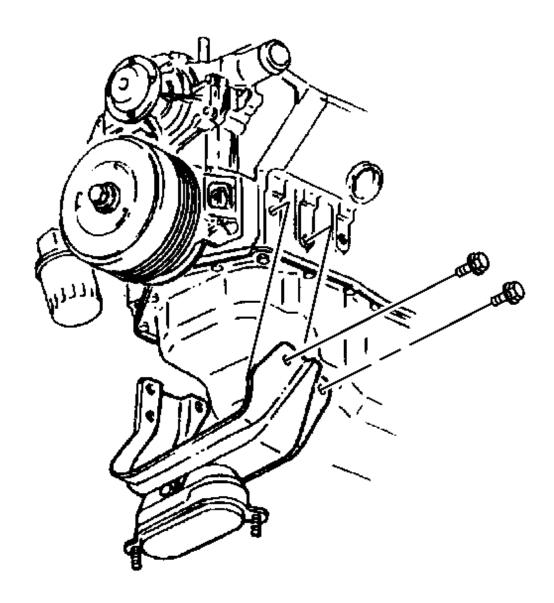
Right Engine Mount Bracket Bolts Courtesy of GENERAL MOTORS CORP.
